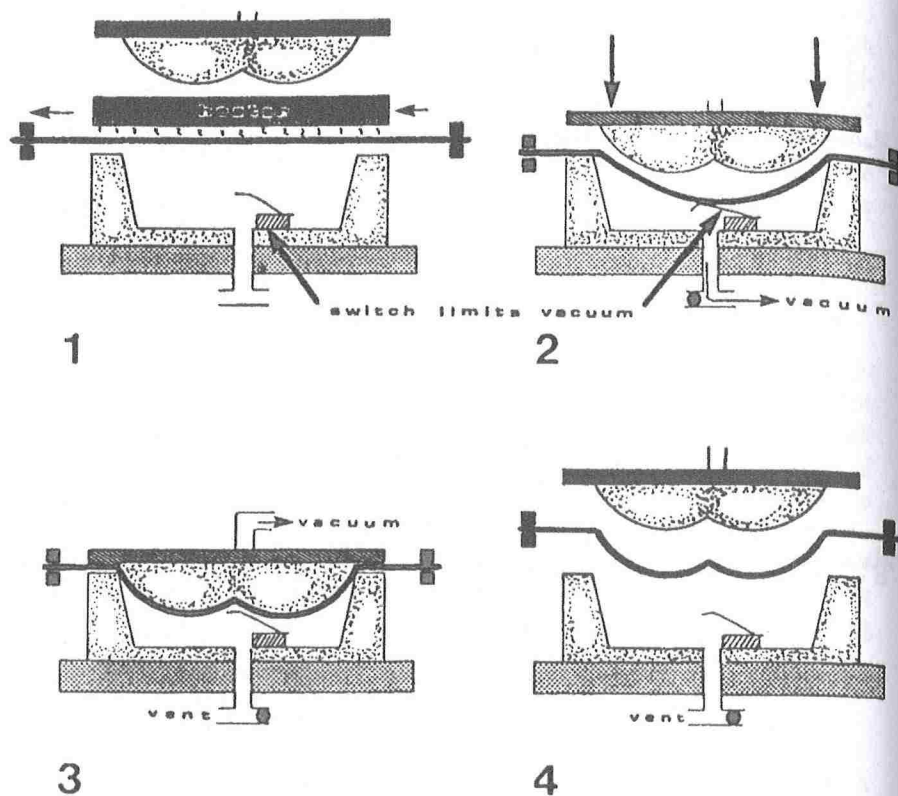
Snapback vacuum forming with a male mold: (1) thermoplastic sheet heating; (2) prestretching of sheet; (3) snapback vacuum forming; (4) mold separation and stripping.
